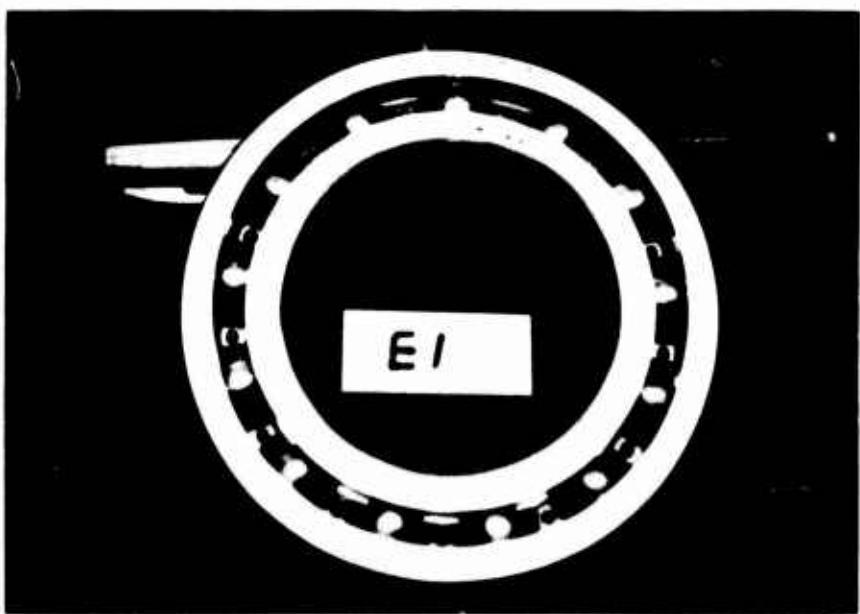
Bearing EI Before Test (Teflon-Coated Pressed-Steel Cage).
